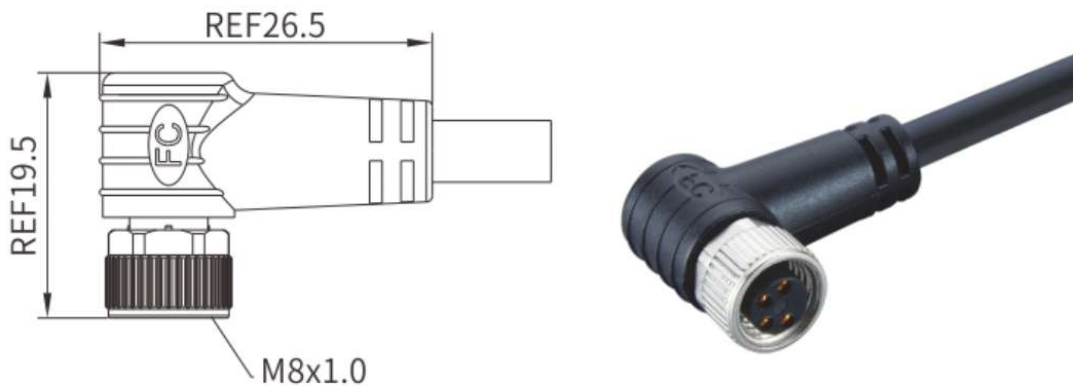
Mating cable connector, M8 right-angle female (M8×1.0), reference dimensions in mm
